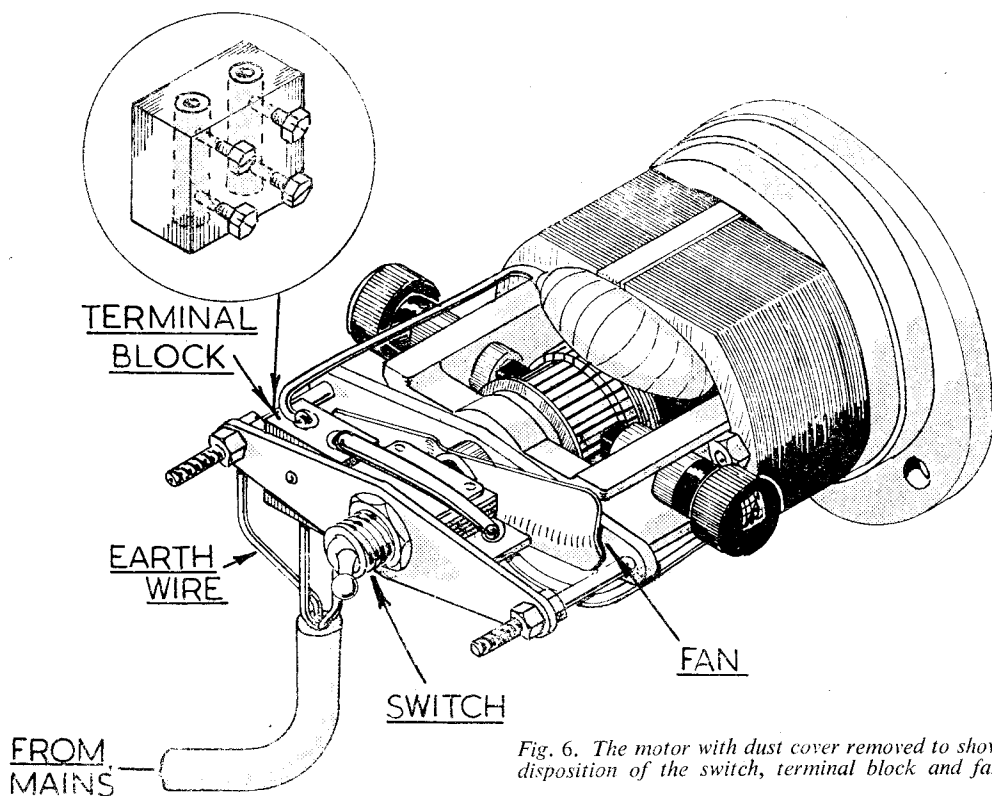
The motor with dust cover removed to show disposition of the switch, terminal block and fan
